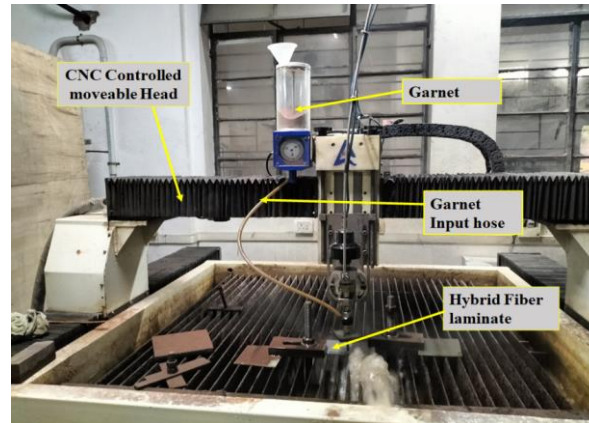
Aqua Jet machining setup loaded with hybrid composite
